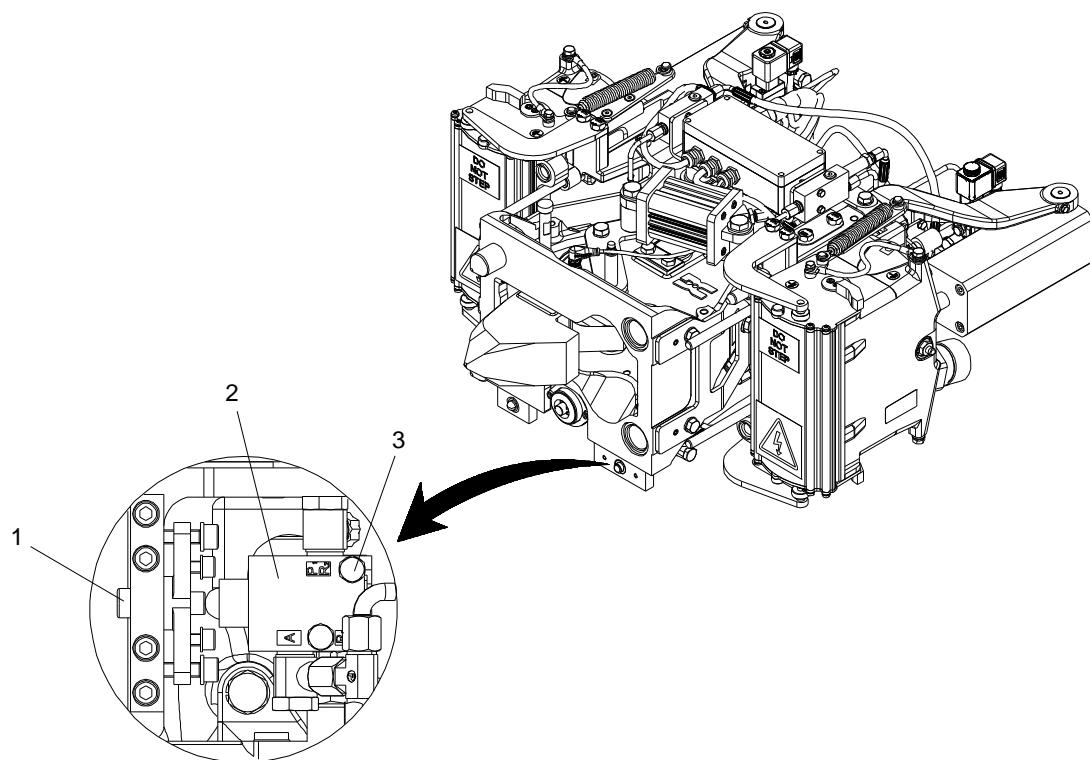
Adjustment of Key Indicator Valve (V5)
